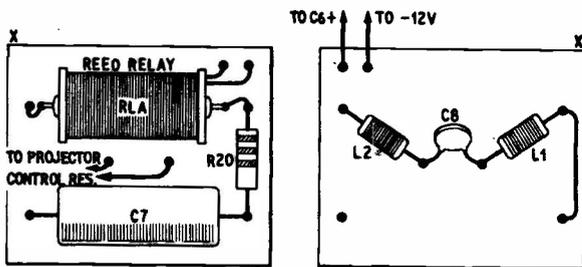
Layout and wiring of components on the reed relay board, to be mounted in the projector
